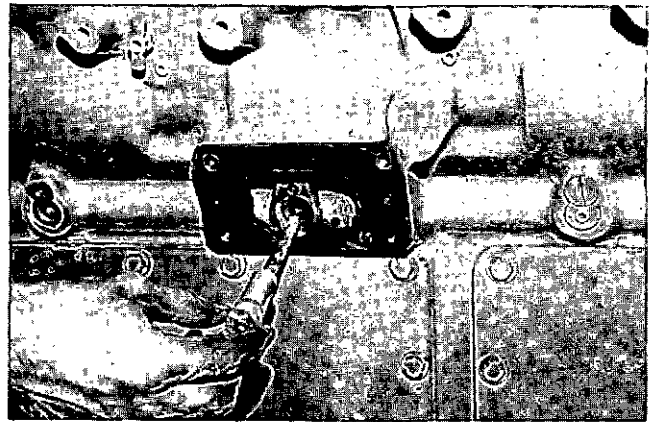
, V414144. Installing piston cooling nozzles
